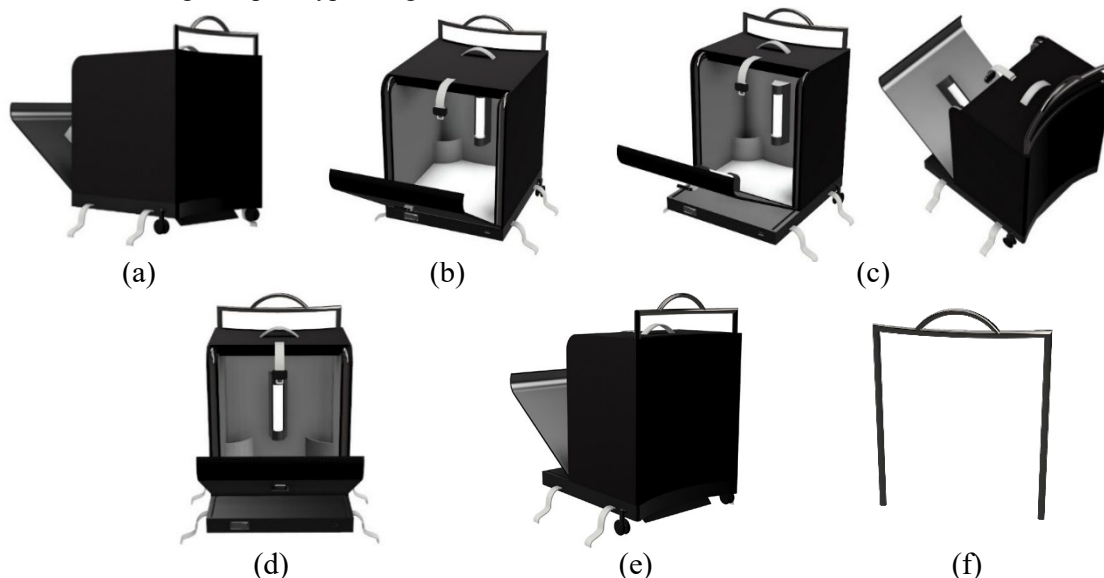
(a) Front Side View (Extended version); (b) Isometric View (Extended version); (c) Isometric View (Unextended version); (d) Back View (Unextended Version); (e) Side View (Unextended version); (f) Back frame
